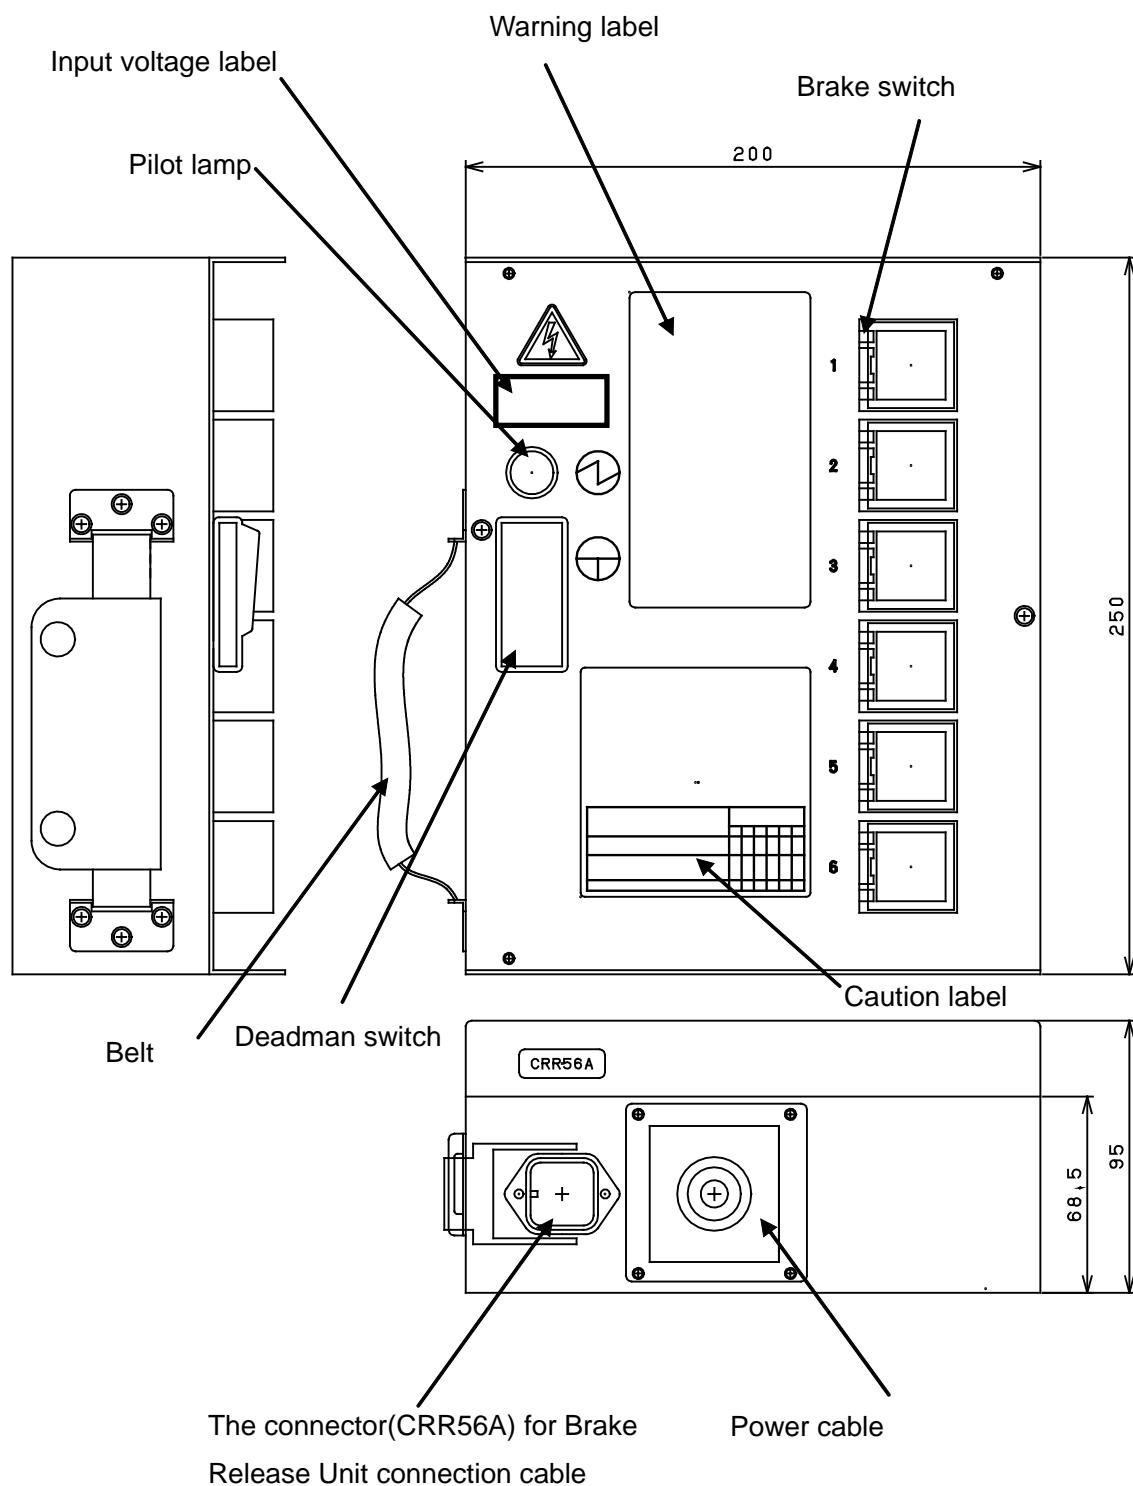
(a) Dimension of Brake Release Unit (Front view)
